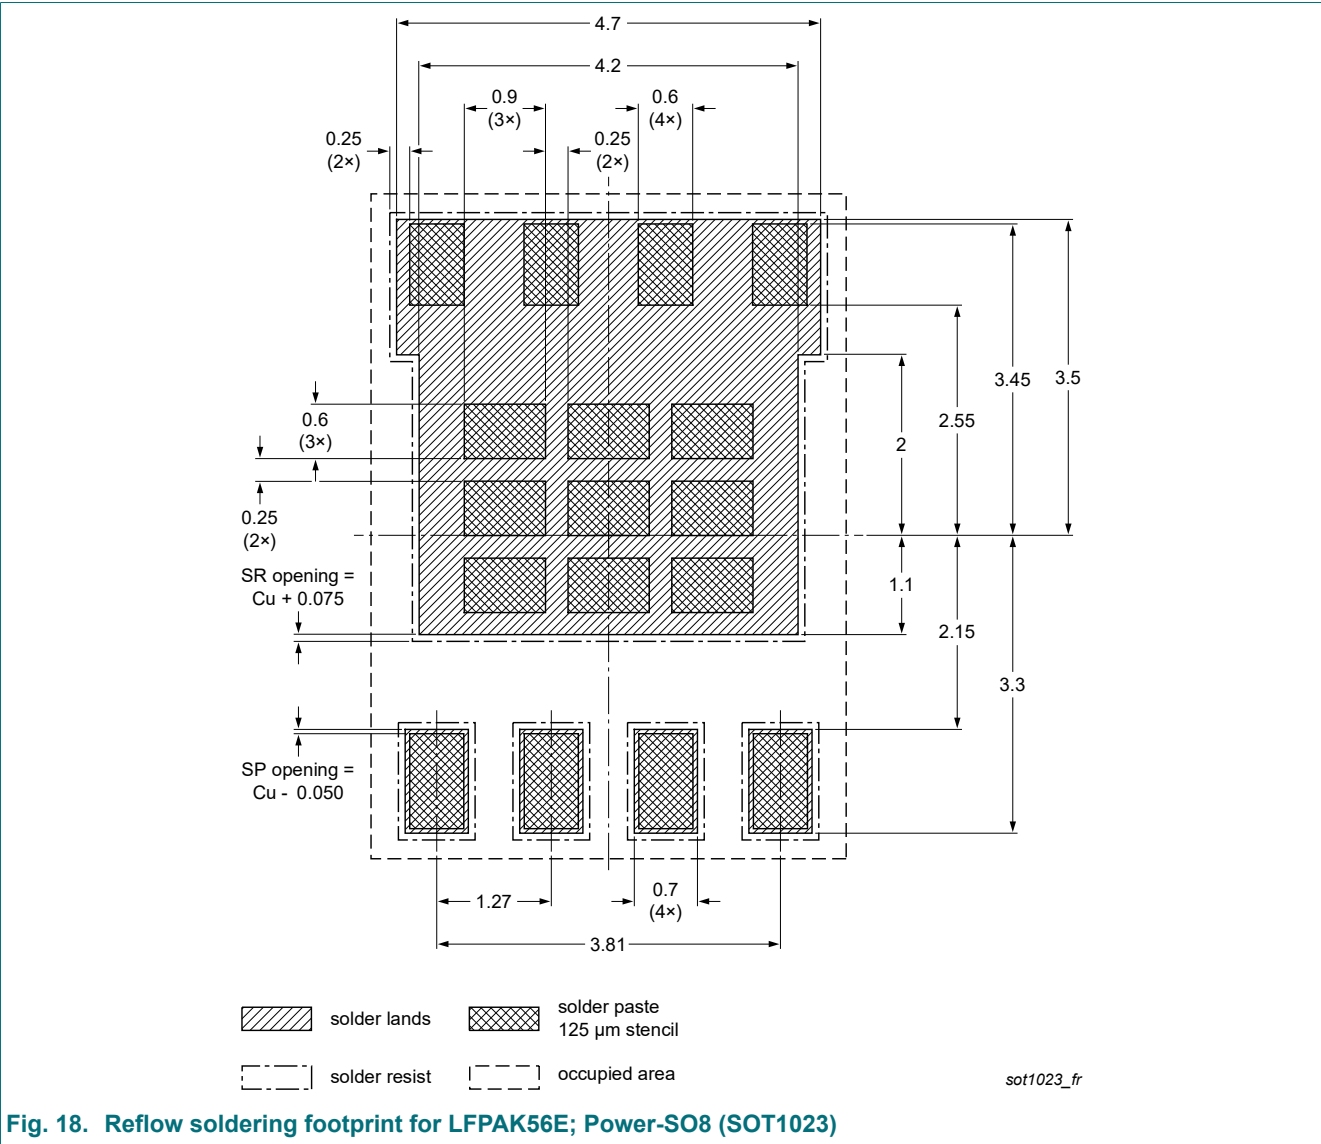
Reflow soldering footprint for LPAK56E; Power-SO8 (SOT1023)
